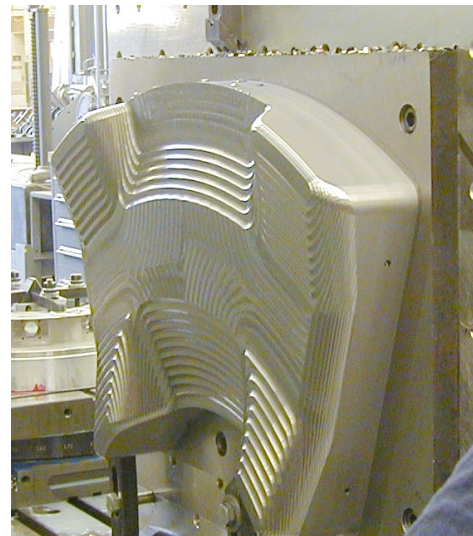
One of the magnet poles after the rough cut on the numerically controlled horizontal milling machine.
